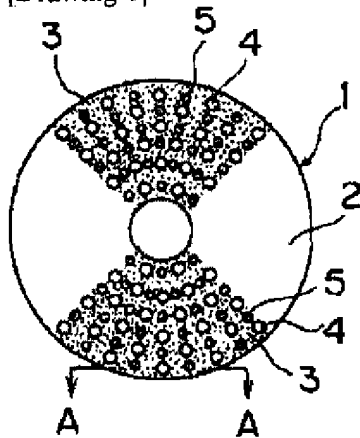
It is the partial section and top view of a diamond wheel which were manufactured by mask thermal spraying.
